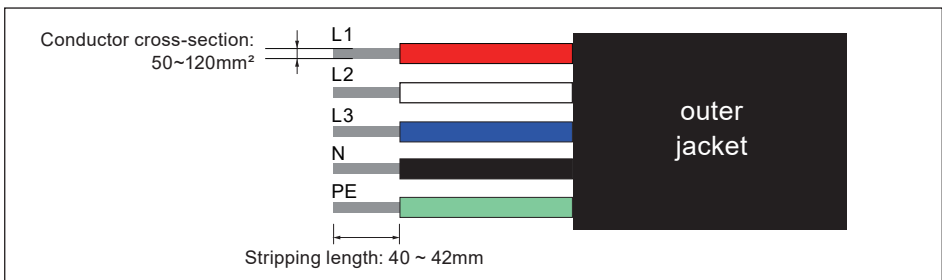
Stripping cables for M88H₁₂₁ AC terminal
